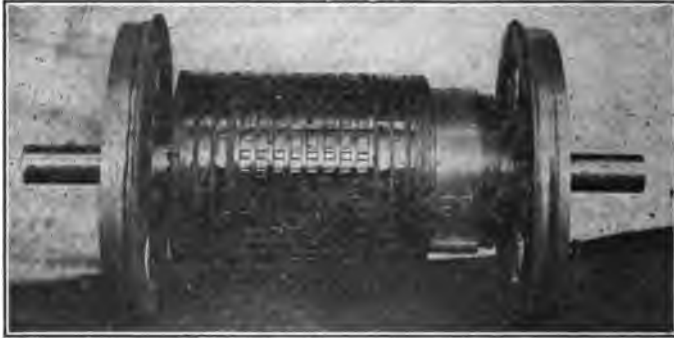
BI-POLAR GEARLESS ARMATURE AND WHEELS
